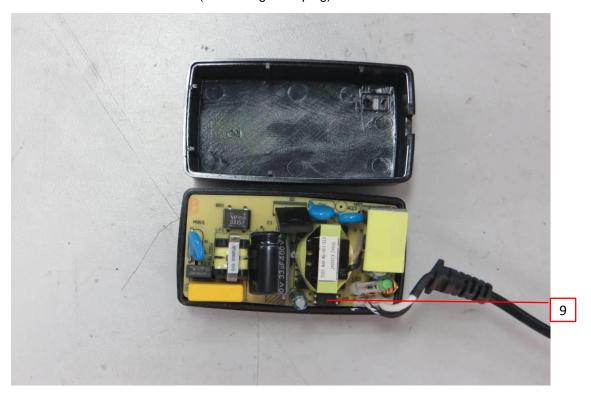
PCB view for GT*96180 series (Interchangeable plug)
